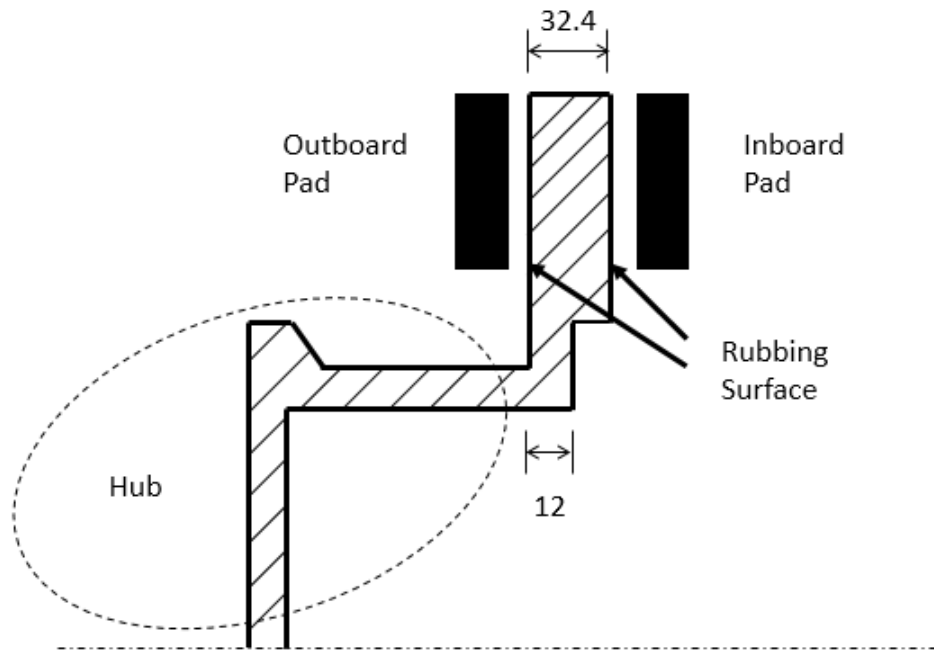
Cross-section of half solid disc with the disc and hub thickness (drawing not to scale and dimensions in mm)
